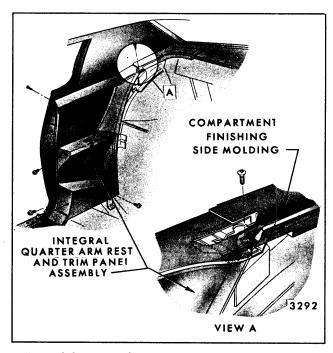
Integral Rear Quarter Arm Rest and Trim Assembly – "69347" Style
